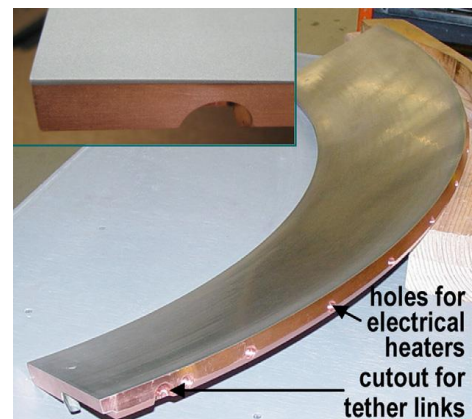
Copper plate with brazed stainless steel skin for LLD
